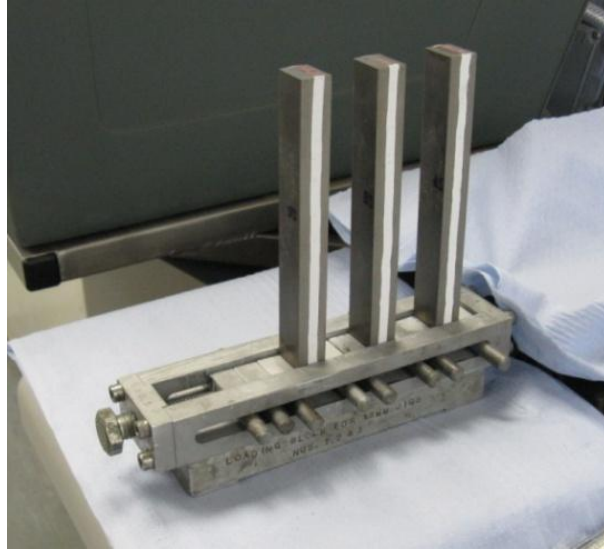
View of the jig used in to bond end-blocks to the relevant fracture mechanics specimens (titanium DCB joints in the picture).
